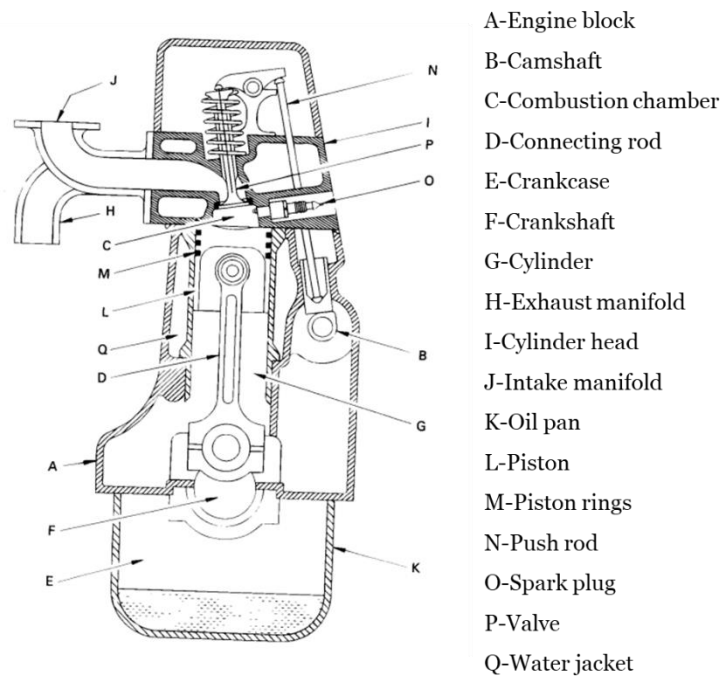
Cross-section of a 4-stroke SI engine [6]
